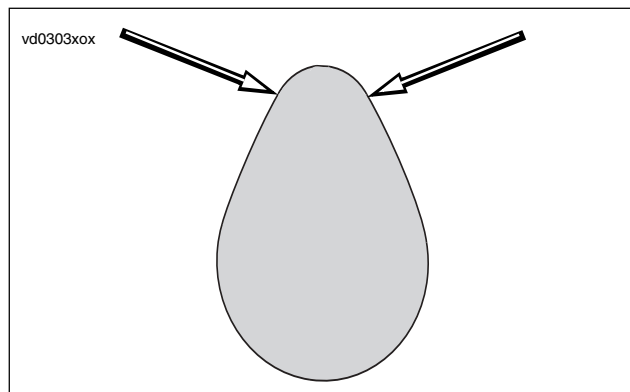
Cam Lobe (typical) showing 15 mm from toe of camshaft lobe on each side of lobe
